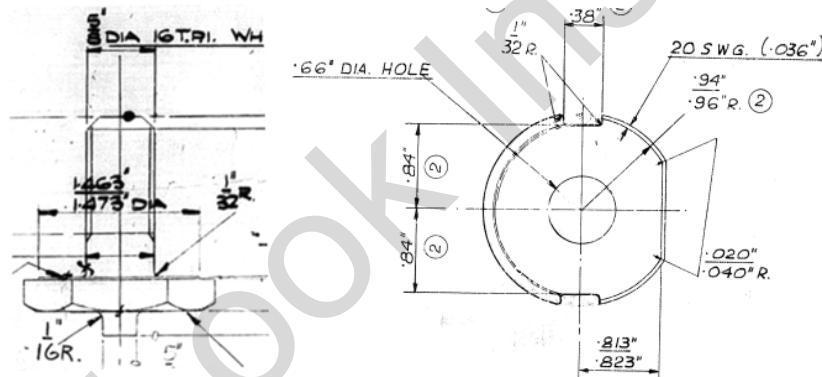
Flywheel bolt 22A747 and locktab 22A1155.
